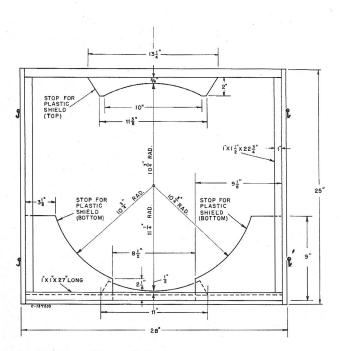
Front View—21AXP22 Tri-Color Kinescope Test Jig
